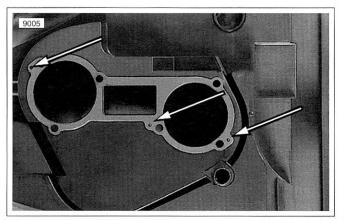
Air Filter Gasket Alignment Pins (3)
